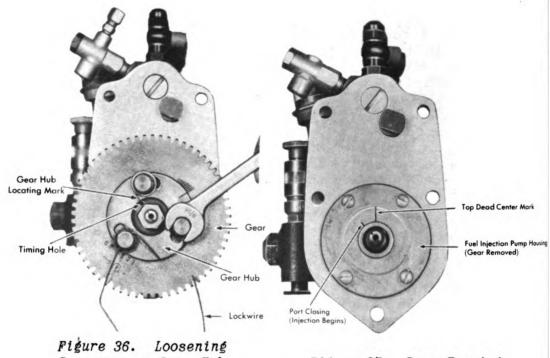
Loosening Capscrew so Gear Hub is Free to Turn
